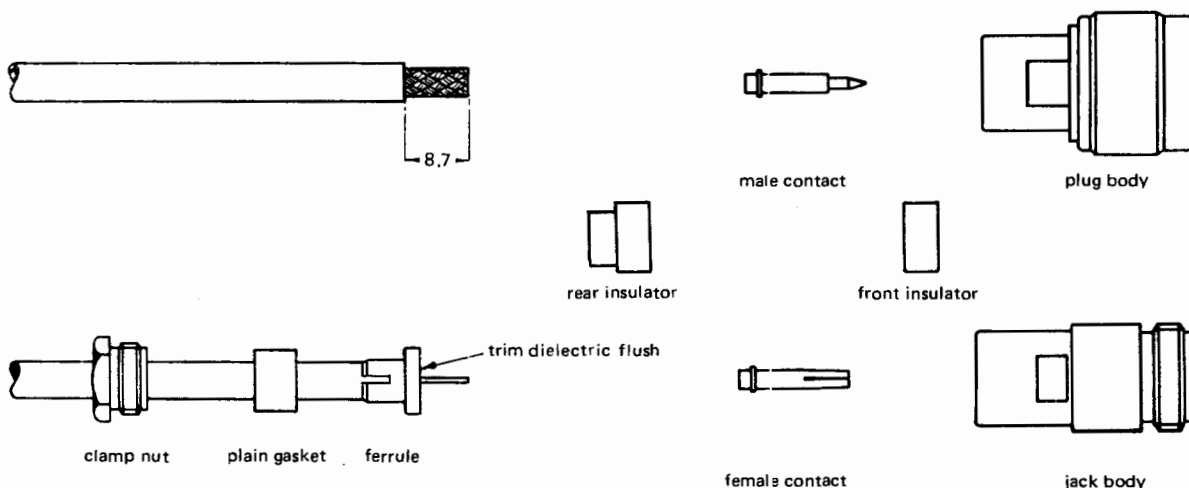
Improved MIL style braid clamp, non-captive centre contact (bulkhead jacks only)
